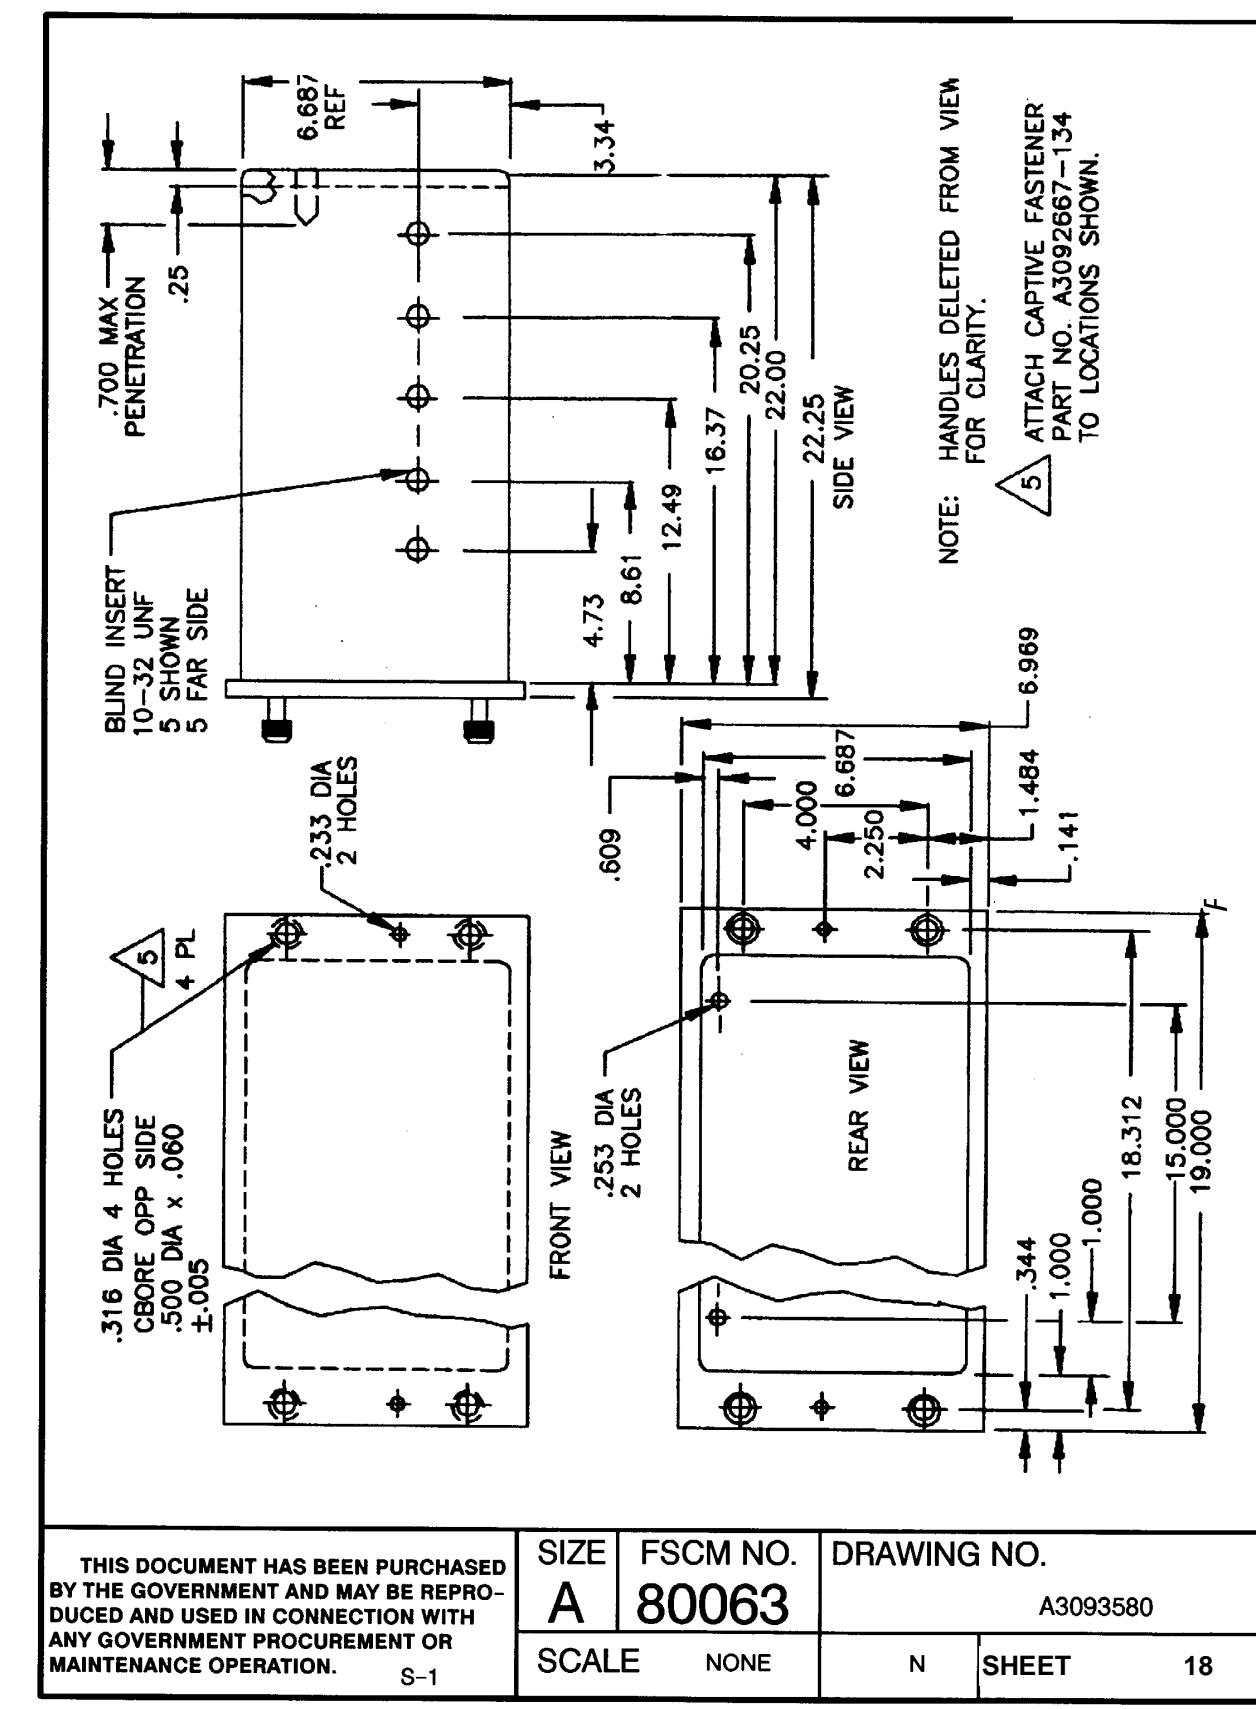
CONTROL ASSEMBLY (-1), PANEL CHASSIS
